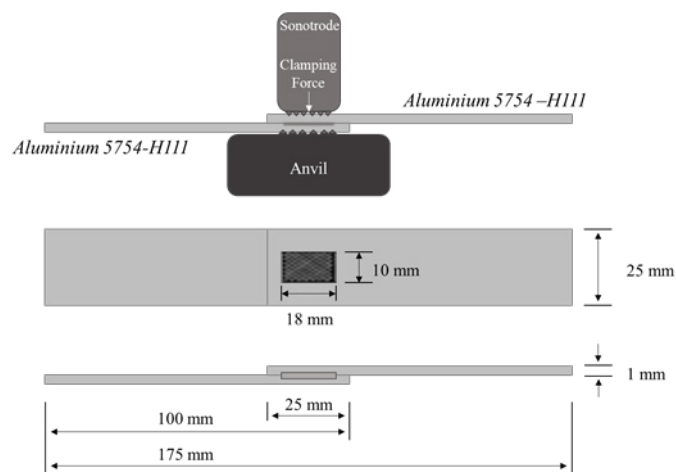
Schematic representation of the welding configuration and coupon dimensions
